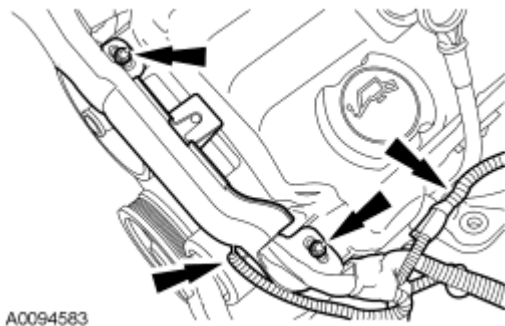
Locating Camshaft Position Sensor (CMP) Electrical Connector
